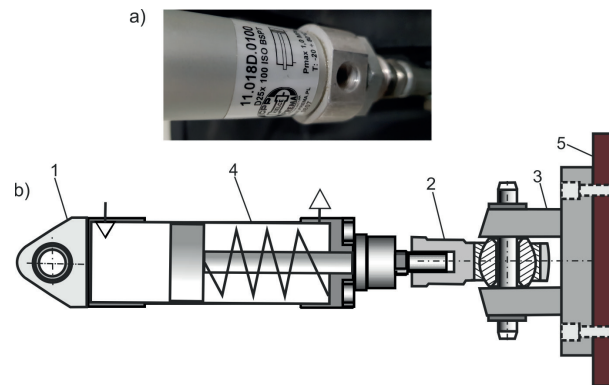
Pneumatic actuator assembly: a) view of pneumatic actuator, b) design solution of an actuator assembly, 1 - pneumatic actuator (single-acting cylinder), 2 - spherical rod-end, 3 - cap-end female clevis, 4 - articulated male rear hinge, 5 - contact pad.
